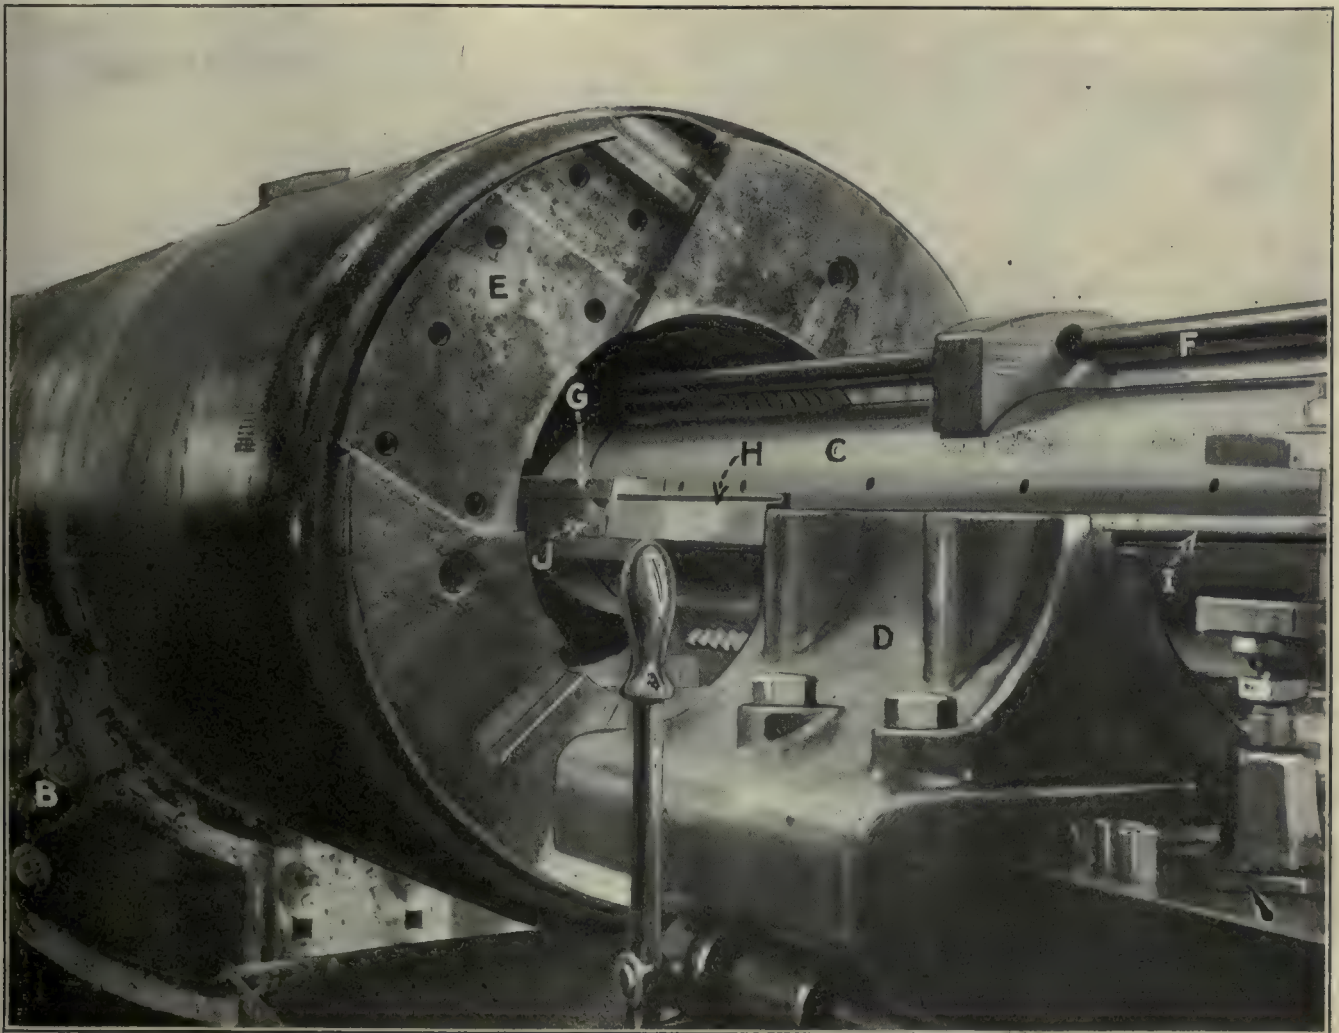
GUN MOUNTED IN LATHE FOR TAPER BORING
